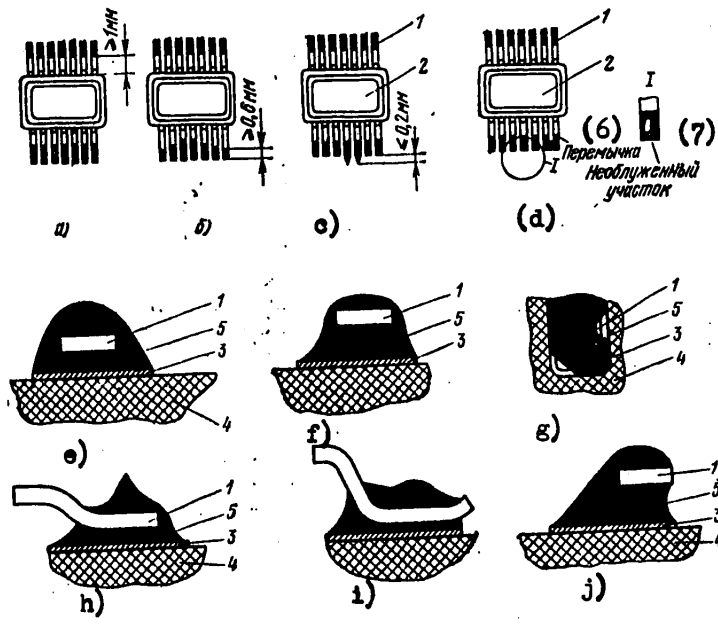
Examples of tinning and soldering leadouts of a planar housing: a -- zone of solder flow; b -- allowable nonuniformity of tinning; c -- presence of "icicles"; d -- nonuniform tinning and false connections; e, f -- flooding form of soldering; g -- partial tinning of contact pad; h, i -- conical shape solder beads; j -- small shift of leadouts; 1 -- leadout; 2 -- housing; 3 -- contact pad; 4 -- printed circuit board; 5 -- solder; 6 -- connection; 7 -- untinned section
